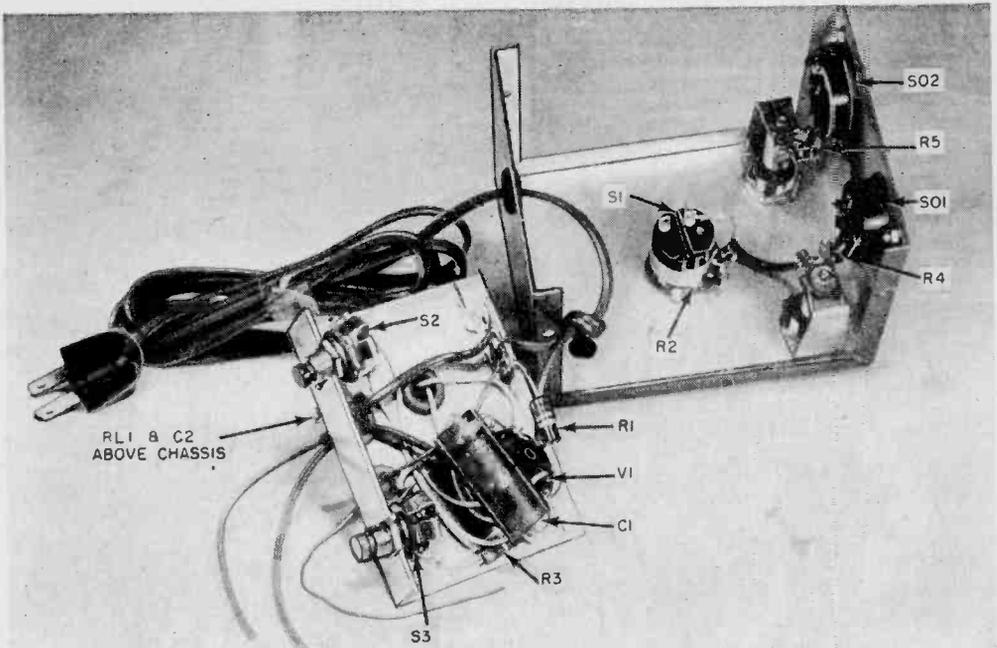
All possible wiring is done before the subchassis and cabinet are assembled.
